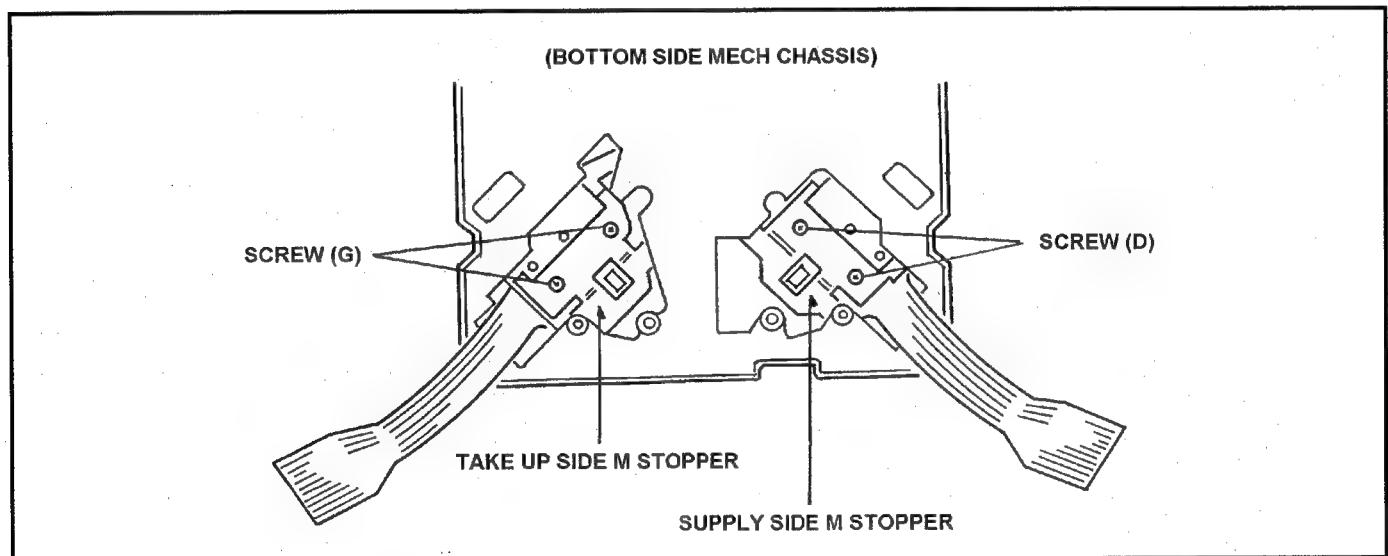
Removal of Supply & Take Reel Rotor Unit
